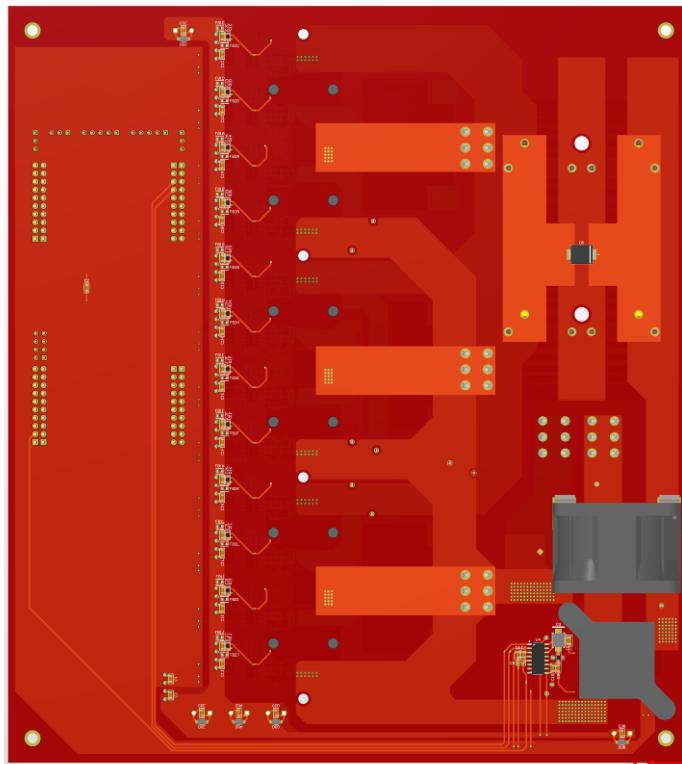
3D orthographic layout of the entire bottom layer.
